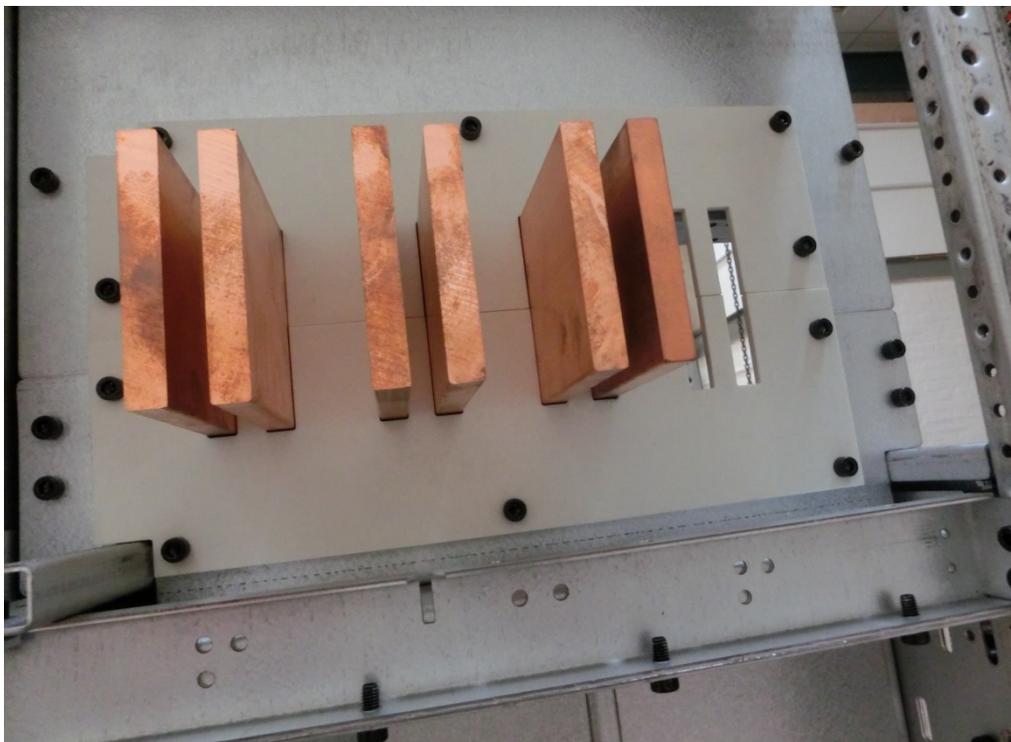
Visual Inspection: Large copper bars and mounting OK.
